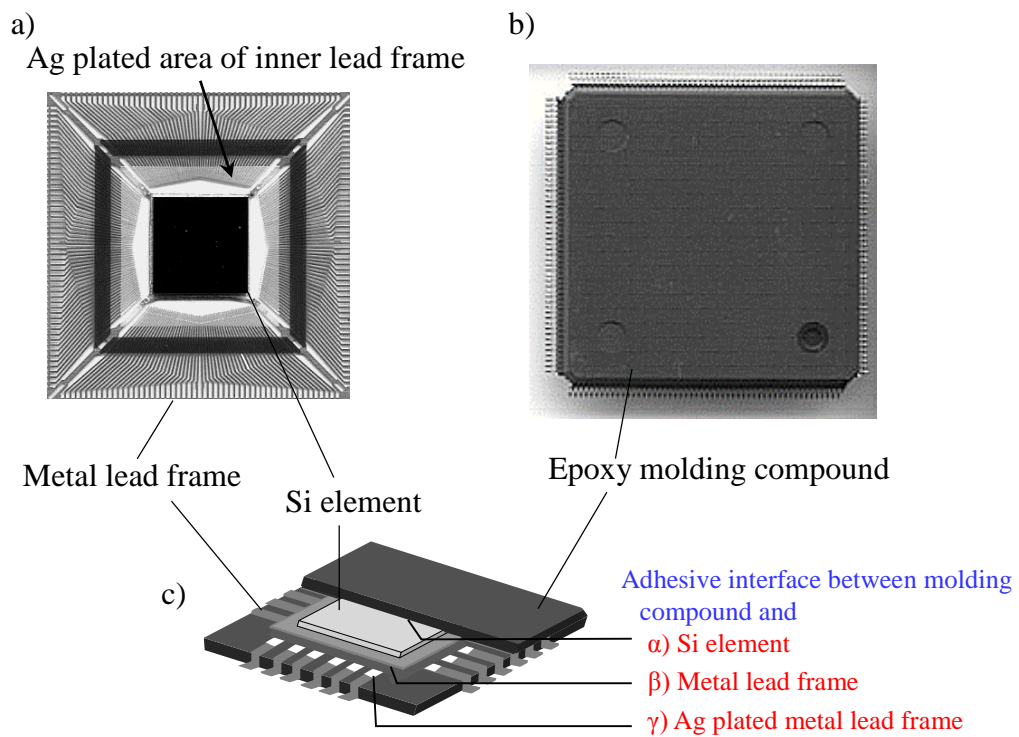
QFP semiconductor package specimen a) Cu alloy lead frame bonded Si element before molding and b) after molding with m-OCNGE and c) Schematic view of the internal package structure.  $\alpha$ )~  $\gamma$ ) shows the each adhesive interface in the package specimen
